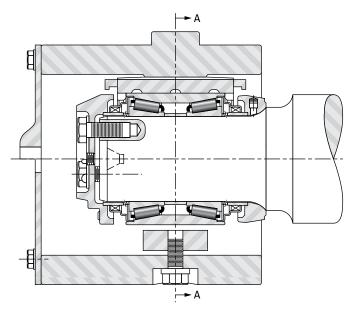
Bottom pour ingot car equipped with Timken AP bearings
